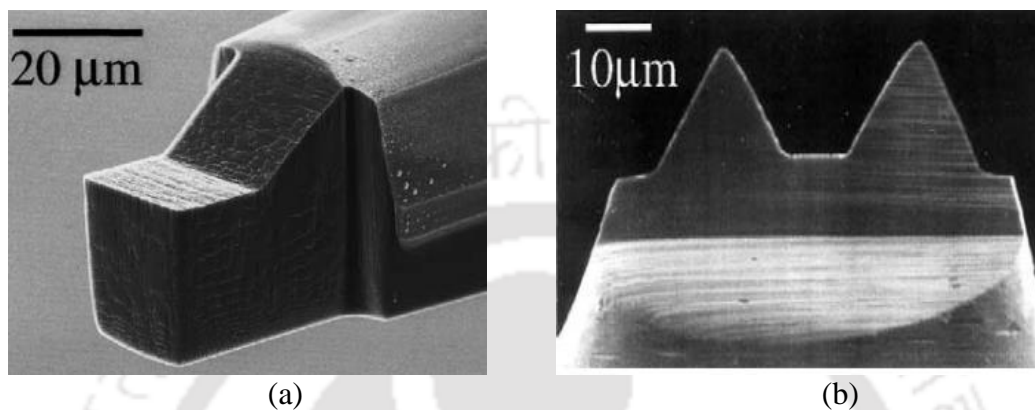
Fabricated microtool by FIB (a) rectangular tip (b) double-triangle tip [29]
